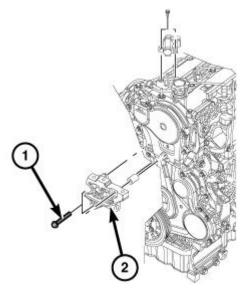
Inner Engine Mount Bracket Courtesy of CHRYSLER LLC
